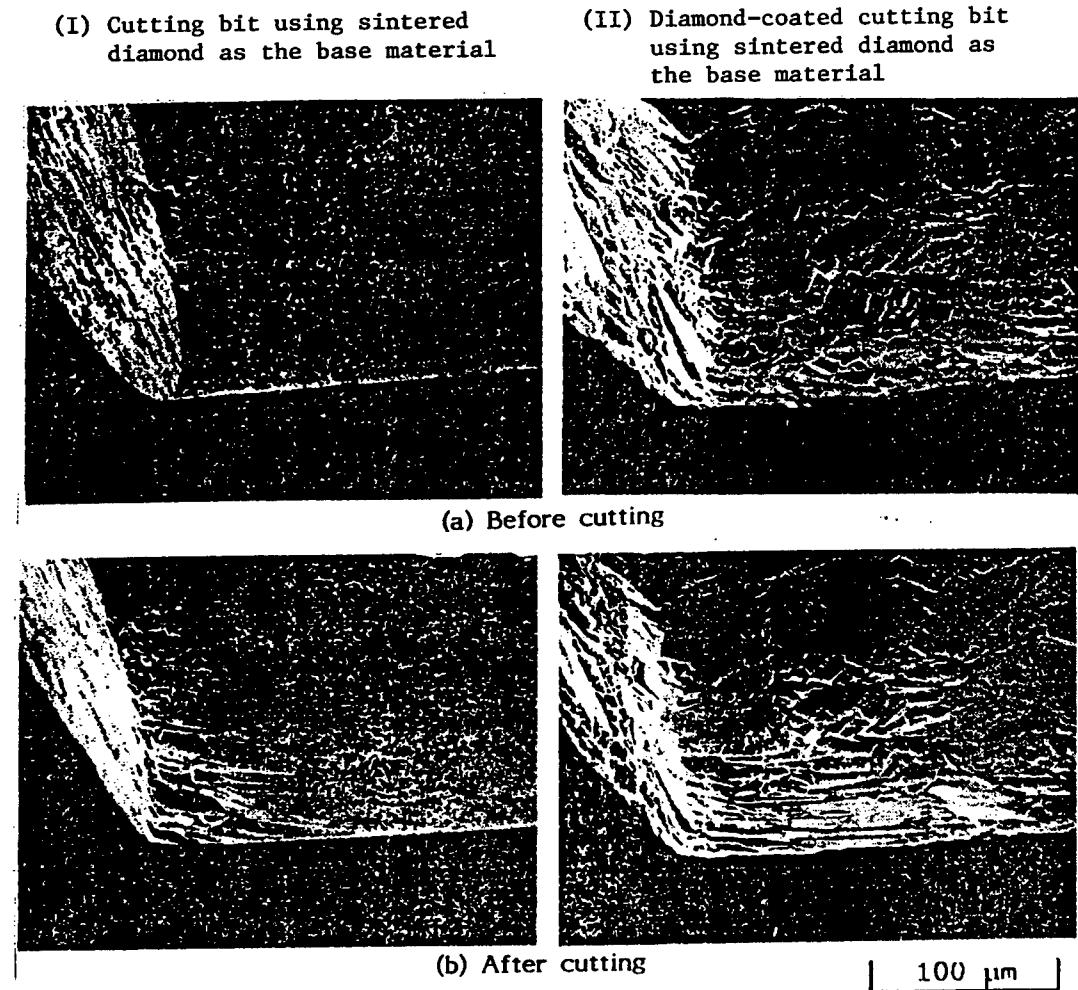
Results of Cutting Sintered Alumina With a Diamond-Coated Cutting Tool Using Sintered Diamond as the Base Material (state of abrasion at the bit edge due to cutting)
